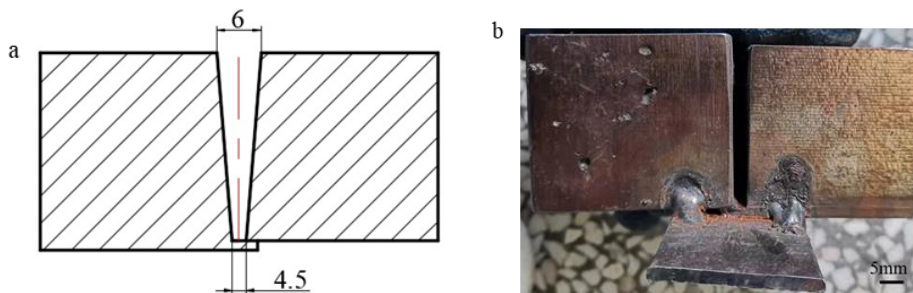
(a) Groove diagram; (b) physical map of weldment
